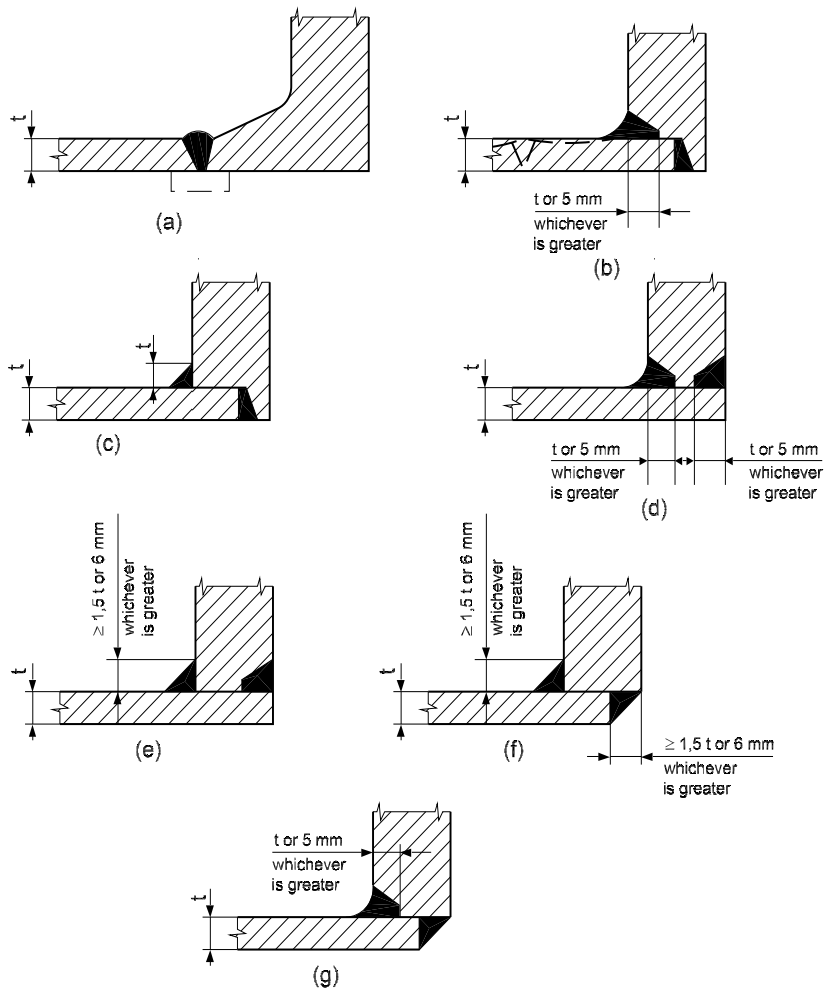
Types of joint for tubesheets to shells (direct connection)
